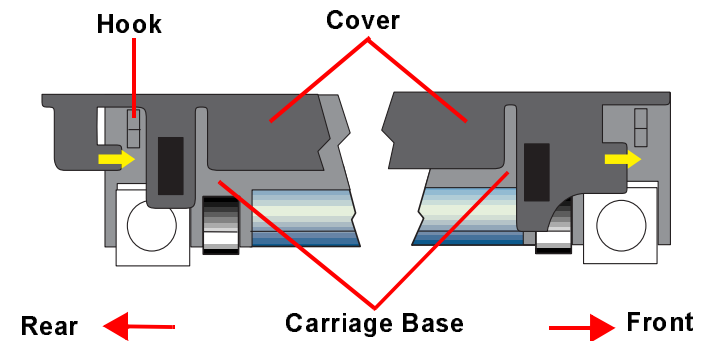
Lamp Assembly and Inverter Board Assembly Removal
